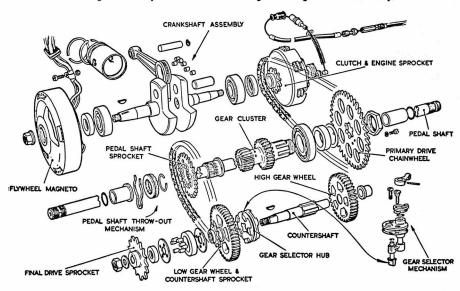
Exploded view of 3K crankshaft and two speed transmission.
